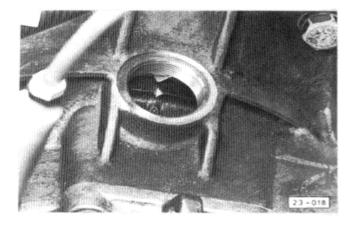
TDC mark on flywheel aligned with pointer in hole in bellhousing
